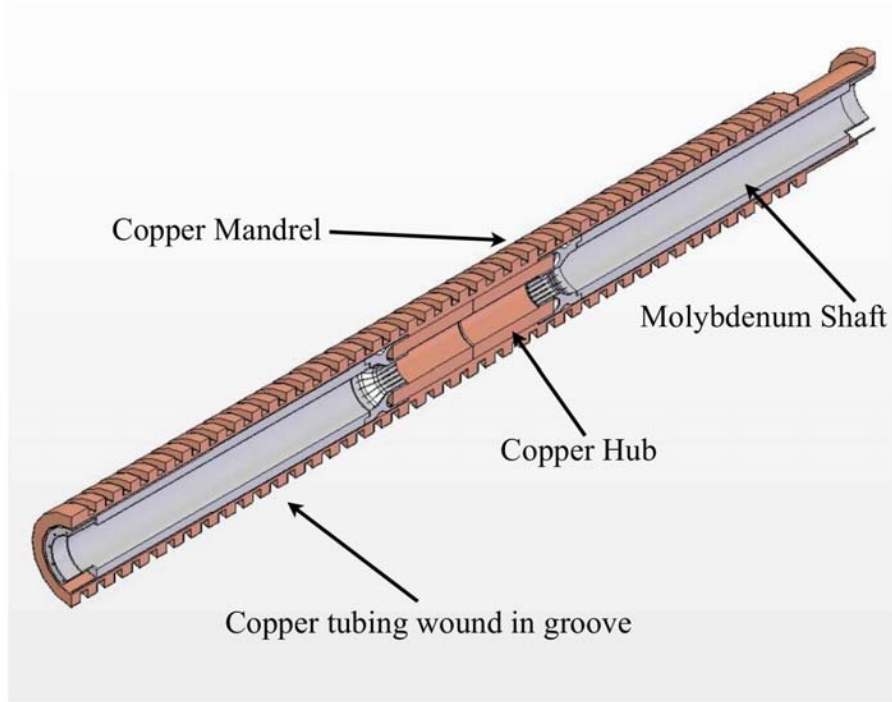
Cutaway of jaw showing inner molybdenum shaft and mandrel.
